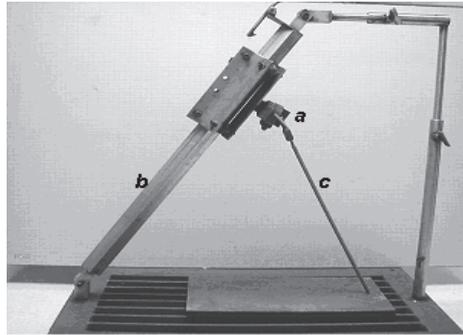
Device used for gravity welding with covered electrode.
